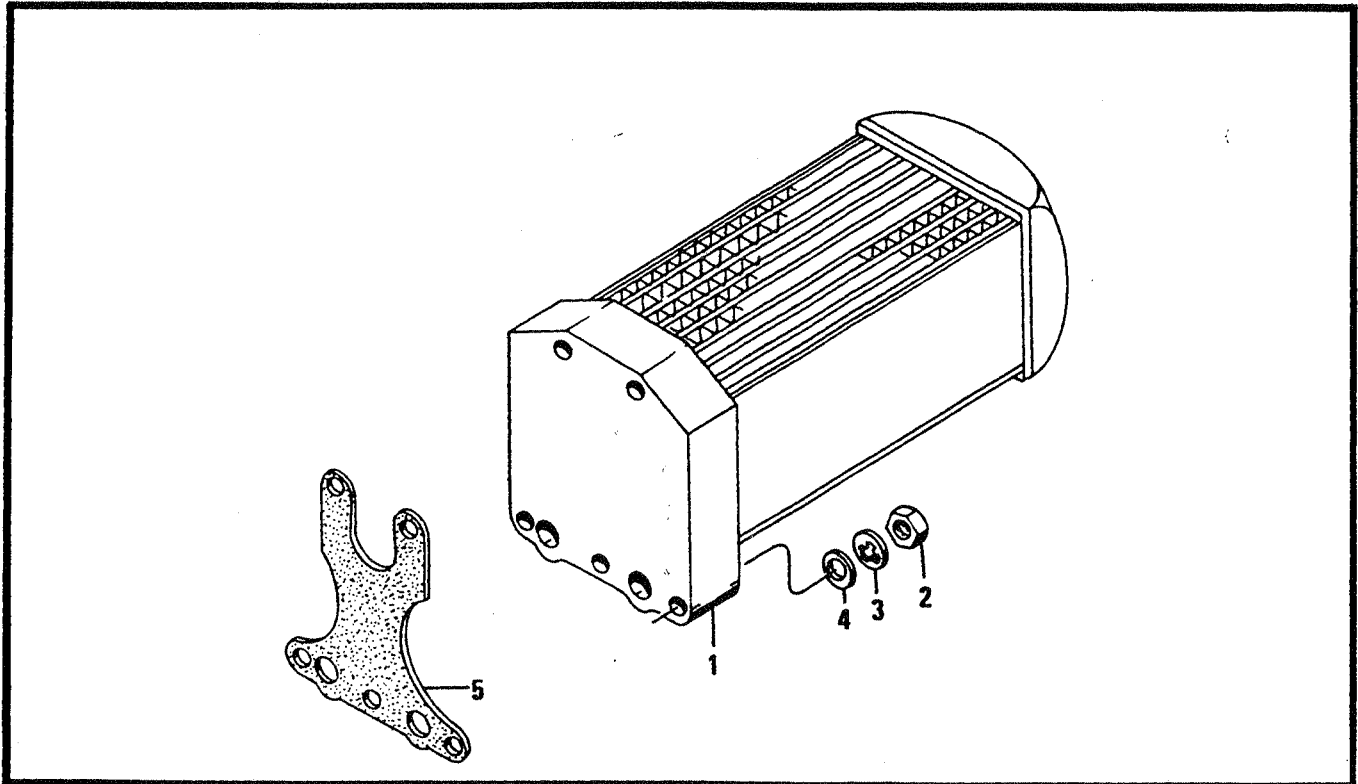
A. OIL COOLER, O-470-A,E,J & K.
